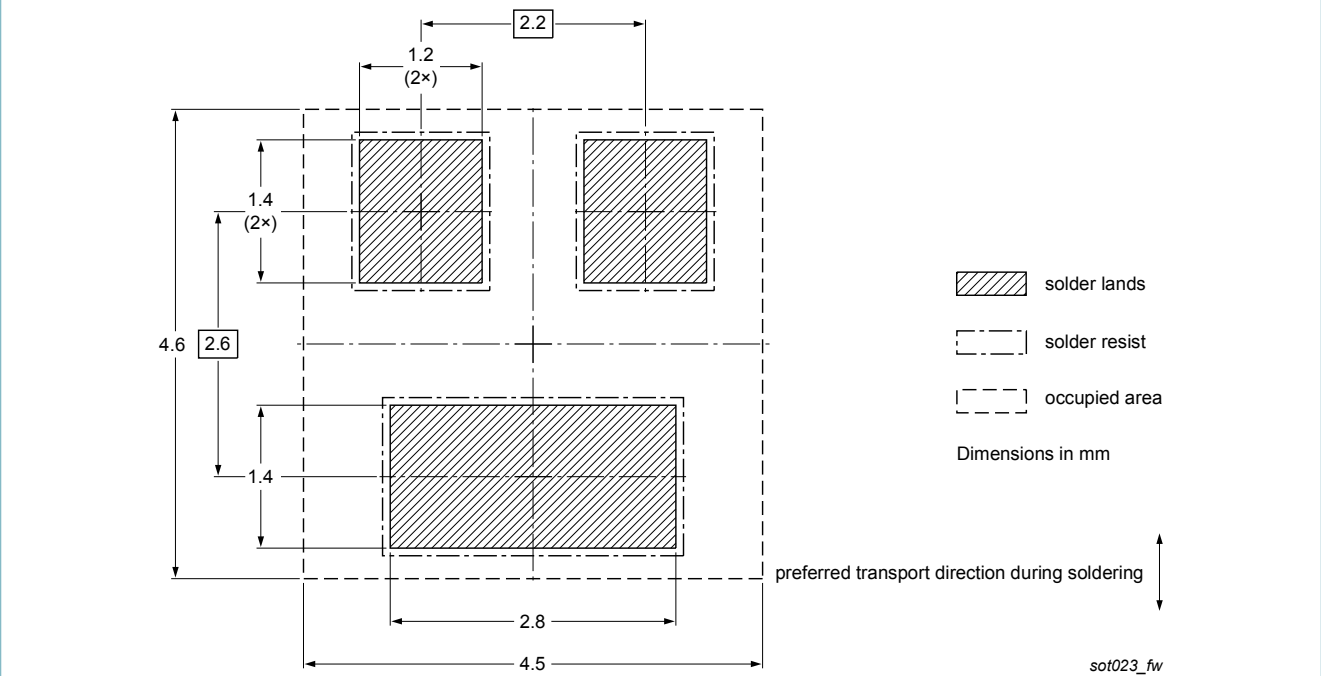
Wave soldering footprint for TO-236AB (SOT23)
